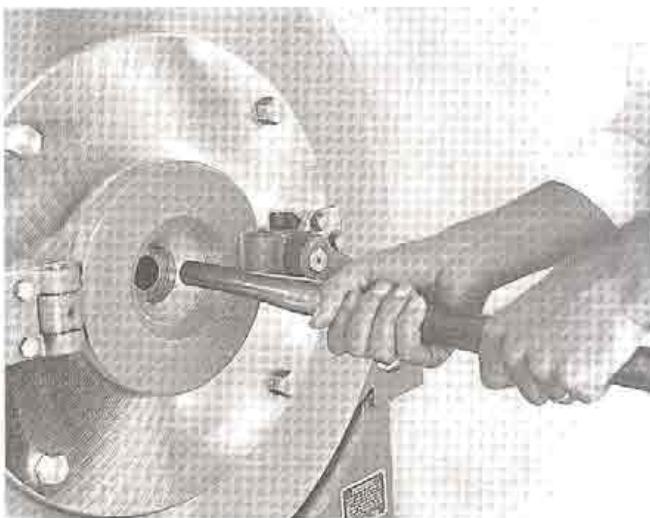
Tube being reduced in a rotary swaging machine. (Courtesy of the Timken Company, Canton, OH.)
